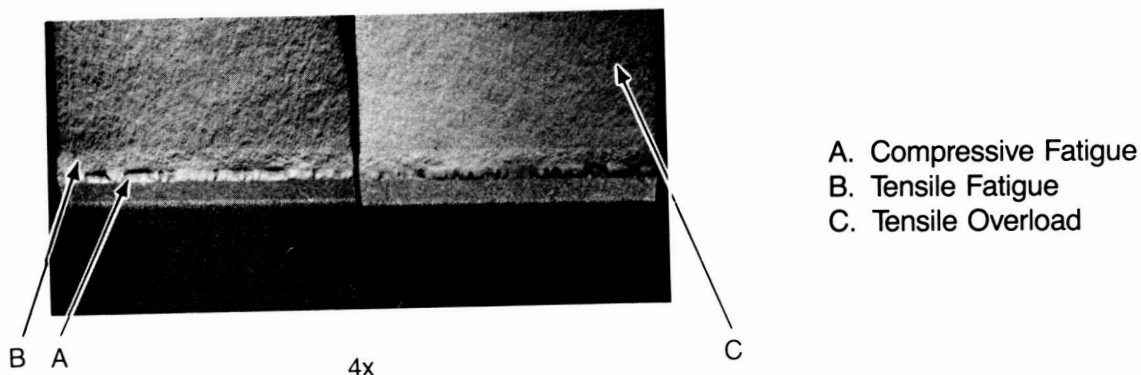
Optical Photograph of the Crack Front Shape of a Tested Specimen.
